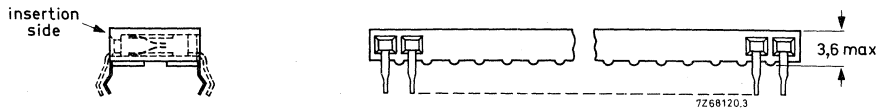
Board edge socket, single row. Dimensions are identical with those in Fig. 3, except as shown.
